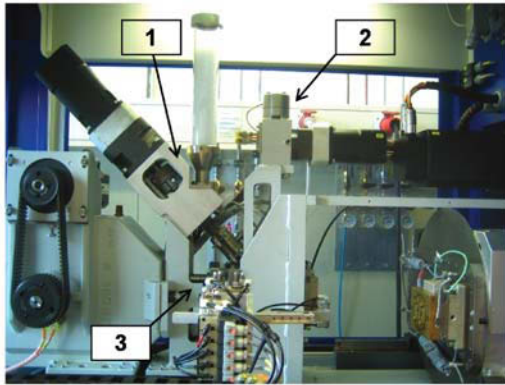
Micro-molding machine and the three-stage unit: plastication (1), metering (2) and injection (3) [8].
